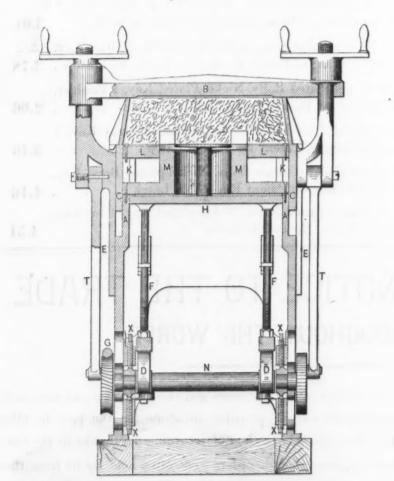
Parts in Position for Removing Flask and Finished Mold.
